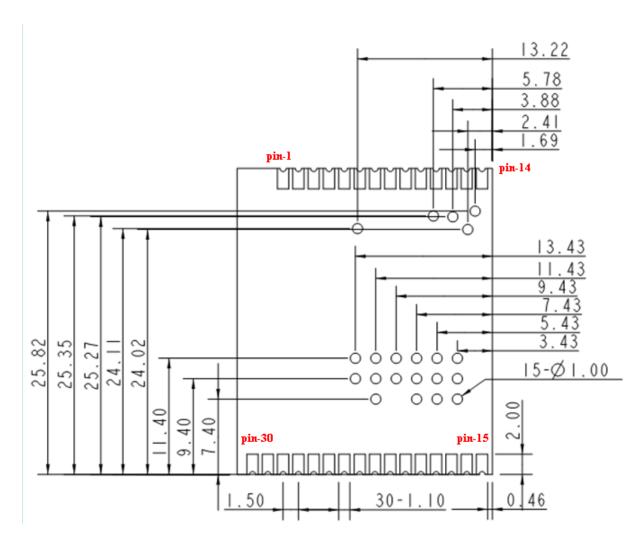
Relevant encapsulation dimensions from BOTTOM view
